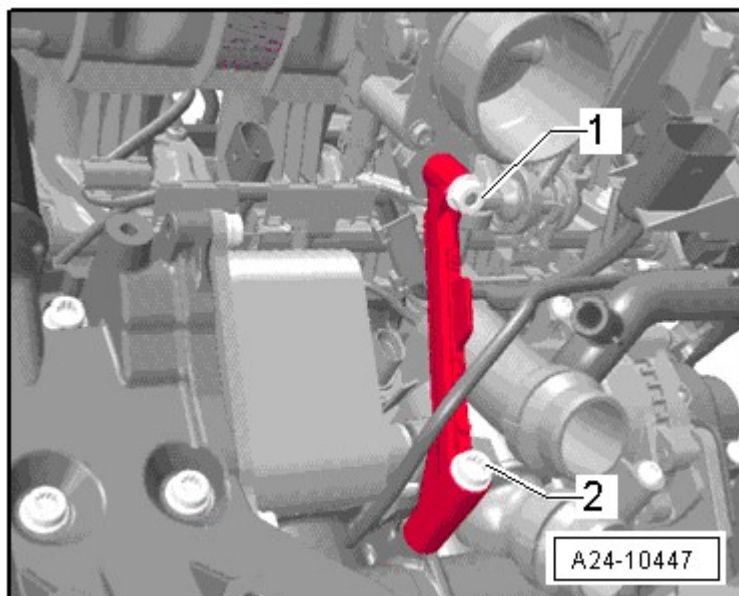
Identifying Intake Manifold Bracket Mounting Nut And Bolt
